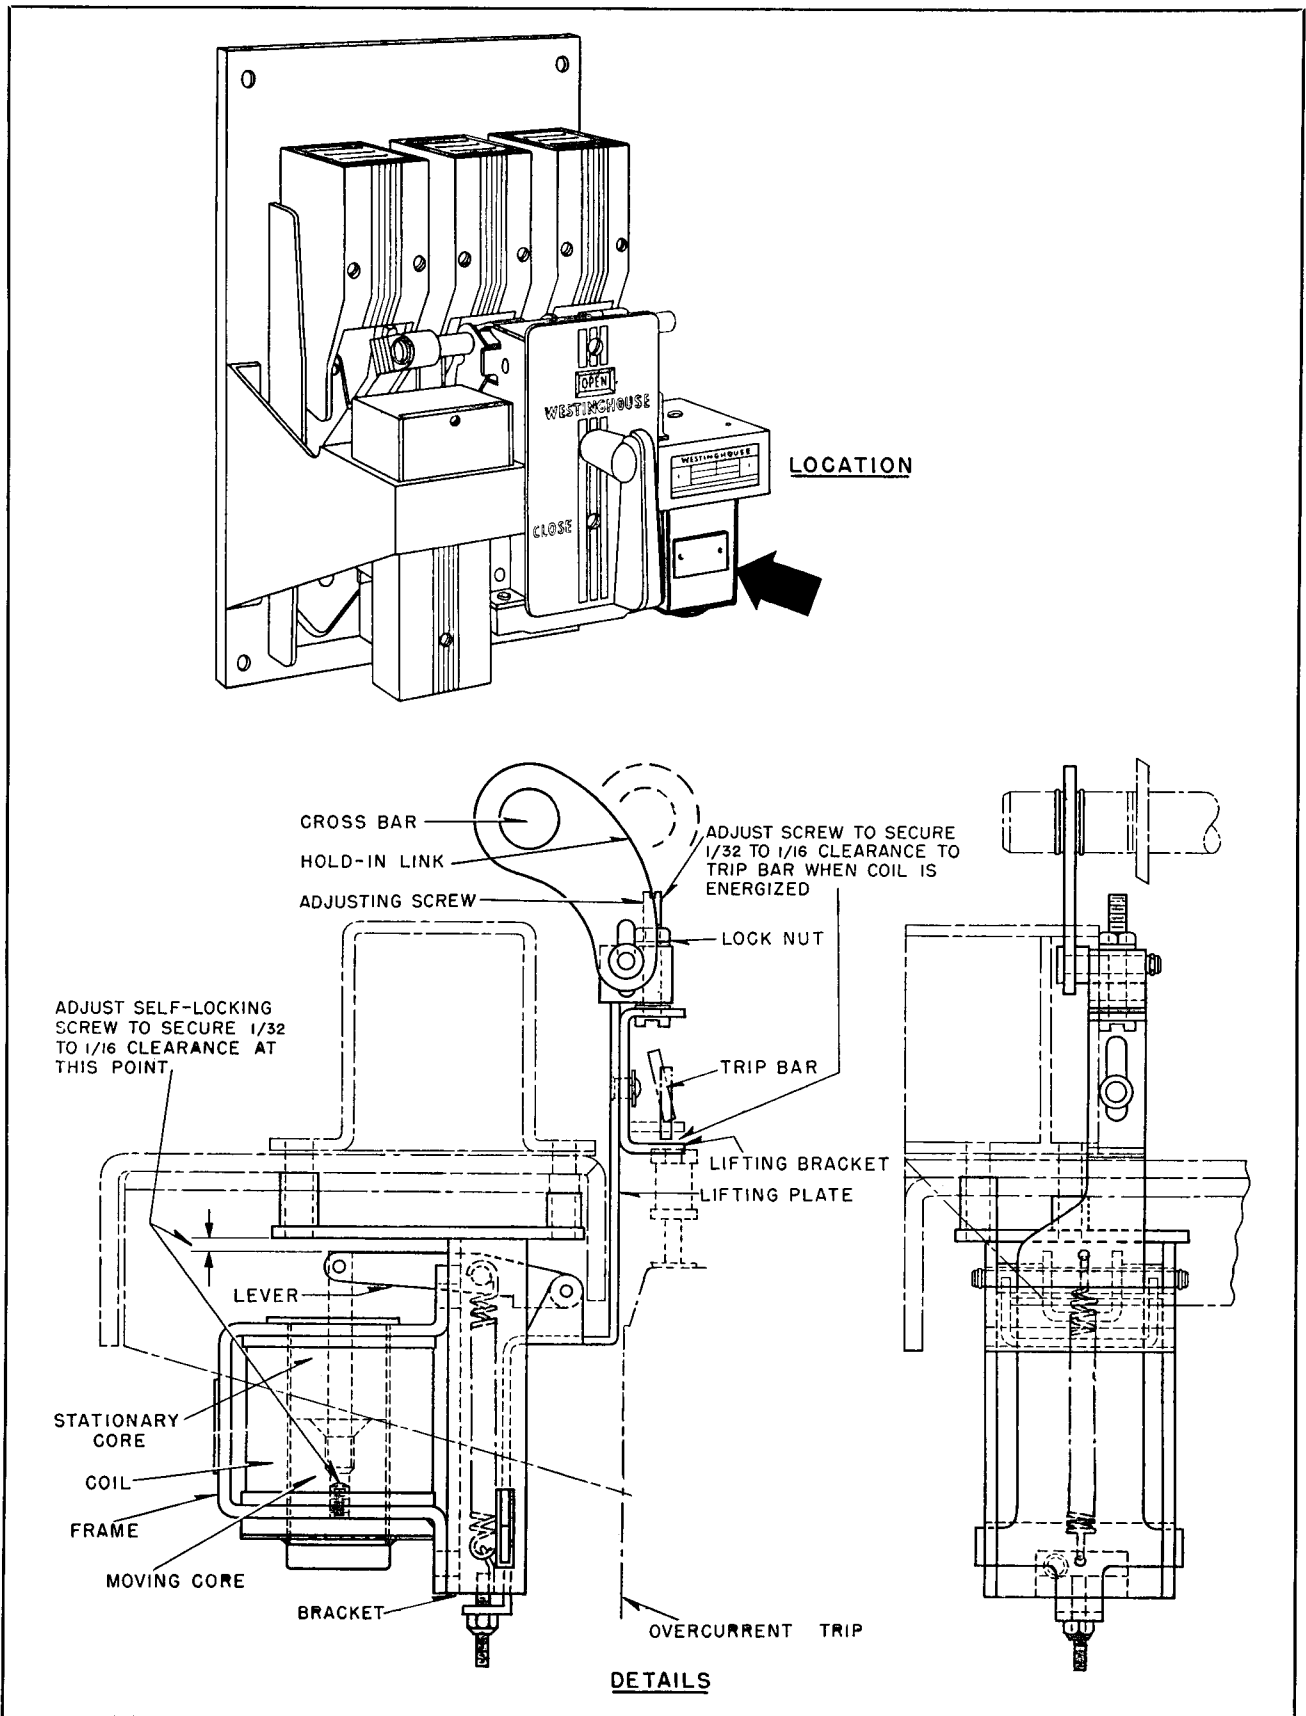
Electric Lockout Attachment—Location and Construction Details
